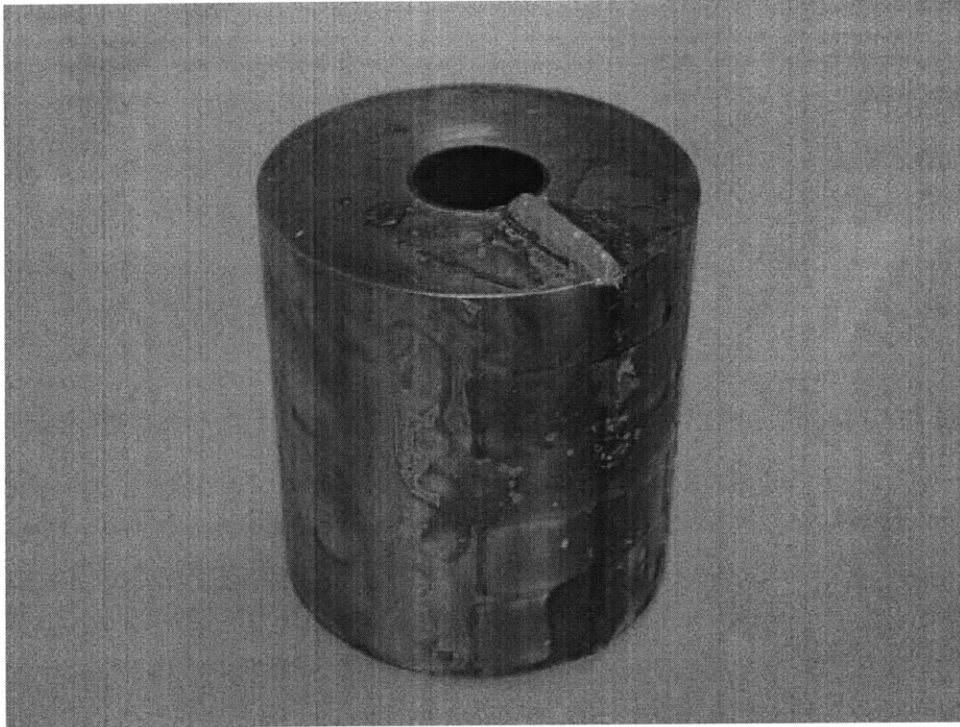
Photograph of the fieldshaper manufactured at MIT.
